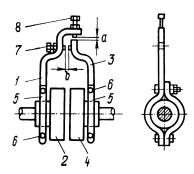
Alignment of two-support shafts by one pair of radialaxial alignment fixtures
